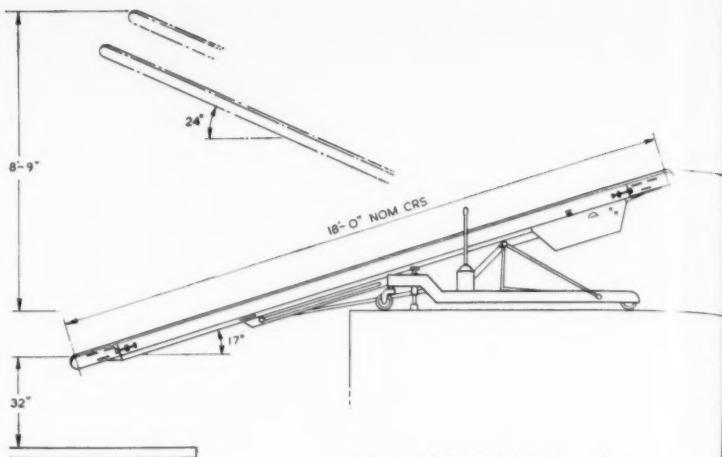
Special application of a universal-movement belt-type 'Loadaveyor' mobile conveyor with details of off-loading requirements
